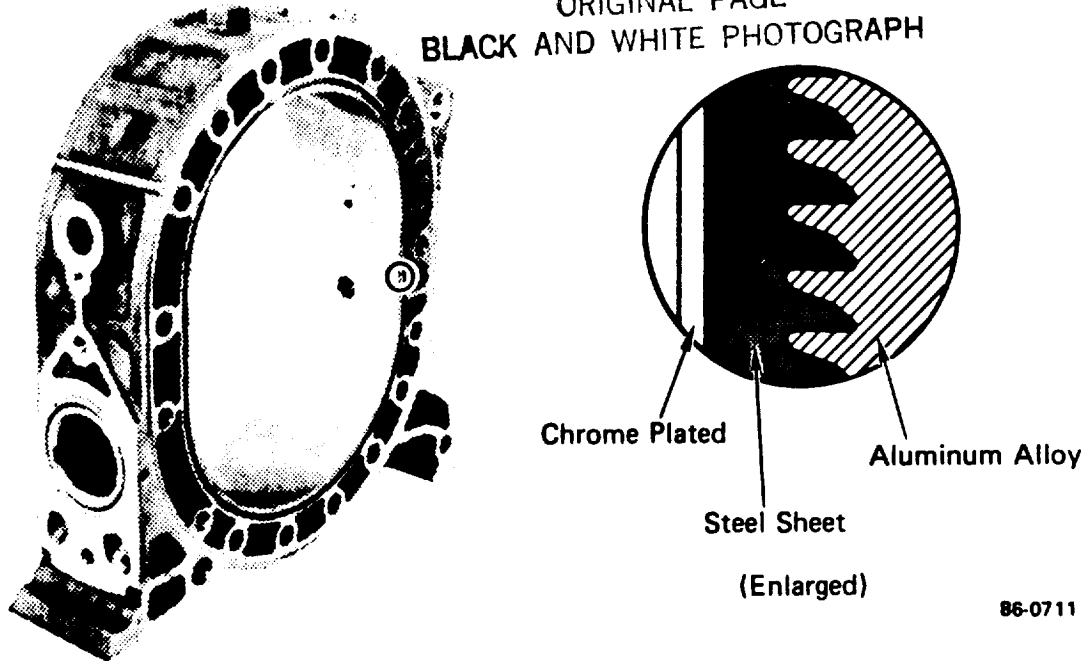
Cross-Sectional Representative of Rotary Engine Housing
